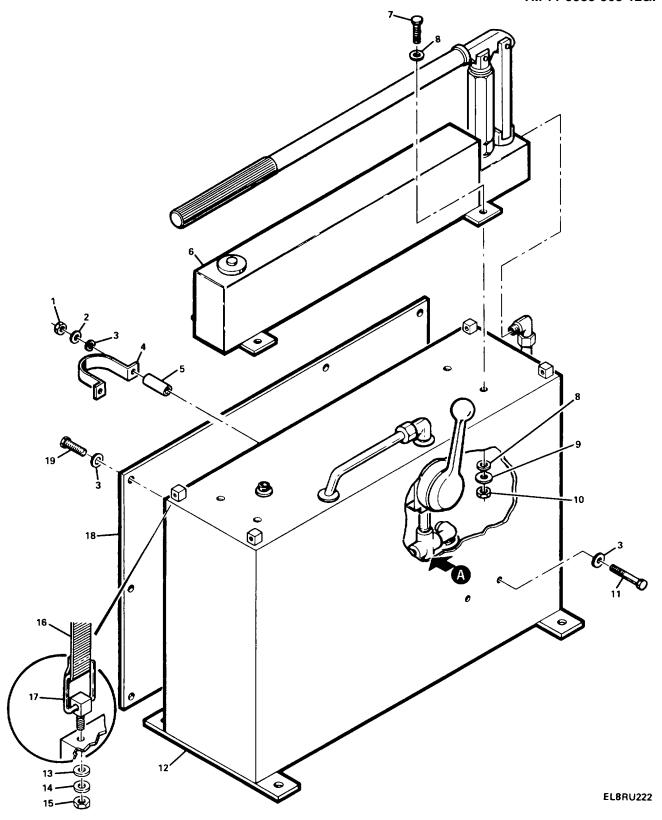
Hydraulic Component Assembly (Shroud) (Sheet 1 of 2)
